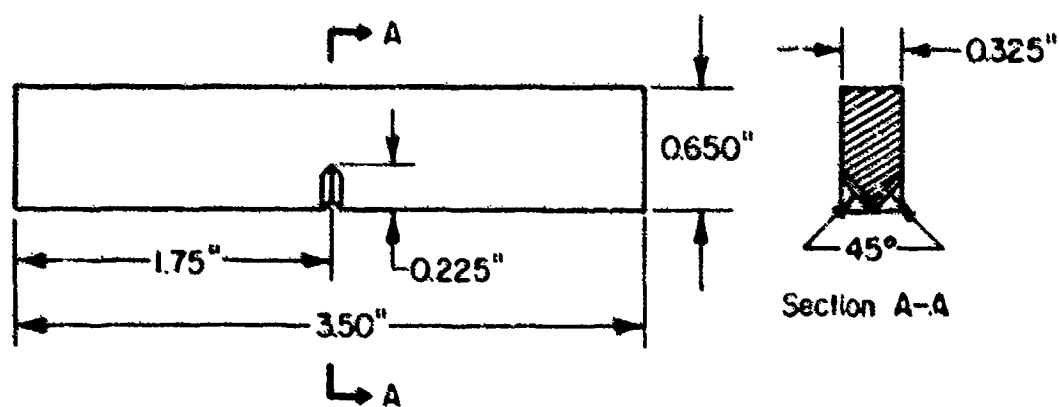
SHEET FRACTURE TOUGHNESS SPECIMEN
